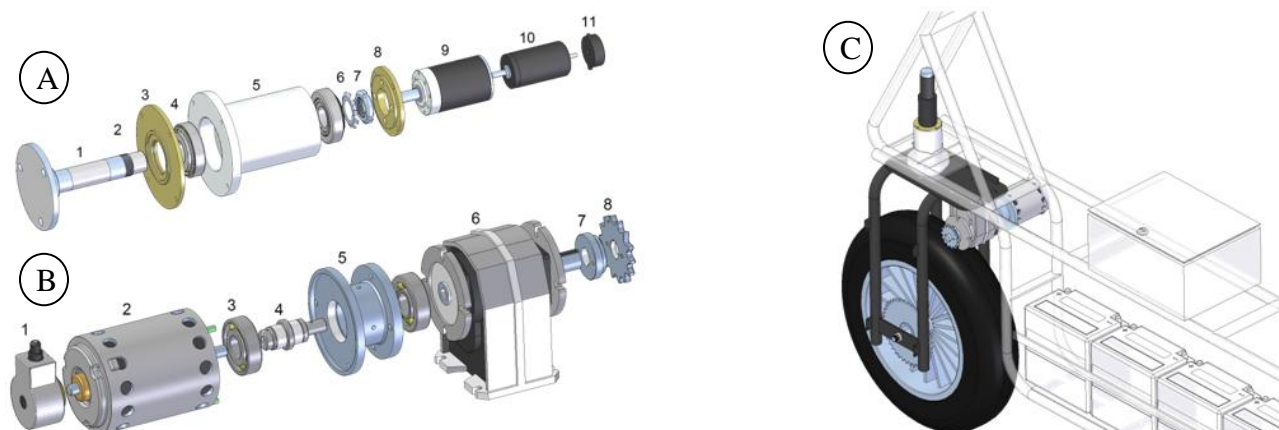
Agricultural Mobile Robot: (A) Steering system; (B) Propulsion system; (C) Detail of the front wheel module.
